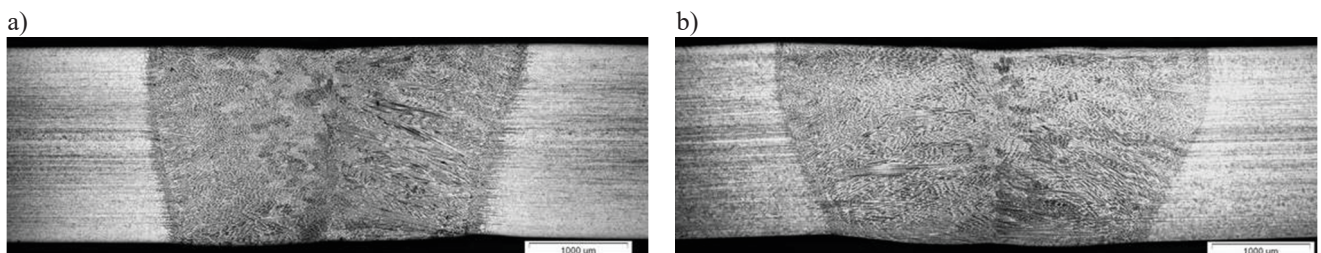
Macrostructure on cross sections of butt joint of AISI 304 steel sheets 2.0 mm thick welded by high power diode (Tab. 4); a) test butt joints A(3) welded with energy input 480 J/mm, b) test butt joints B(5) welded with energy input 440 J/mm (Tab. 4)
